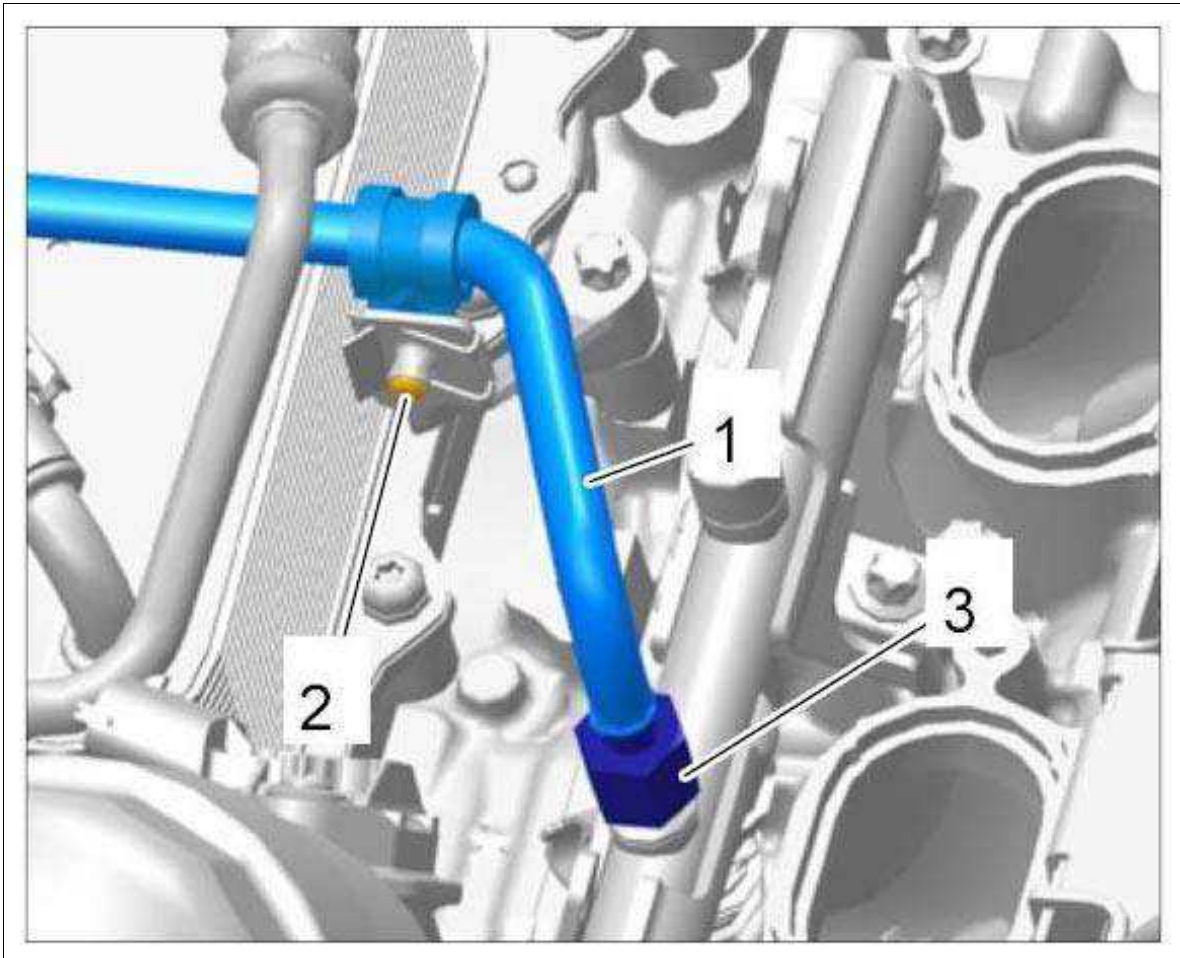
Identifying Fuel Line Threaded Joint, Side 1-3
